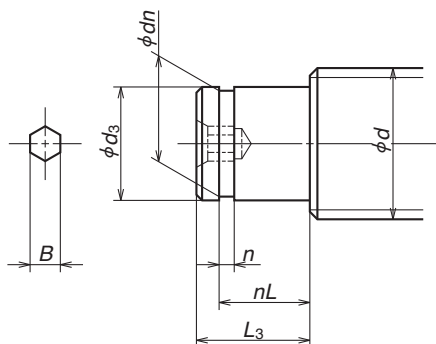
Shaft end configuration of R Series (opposite to the drive side)
